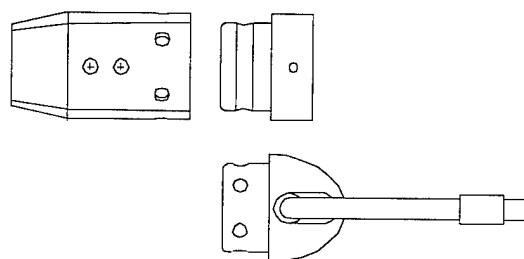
Cable-Epoxy Capsule and the Fittings.
